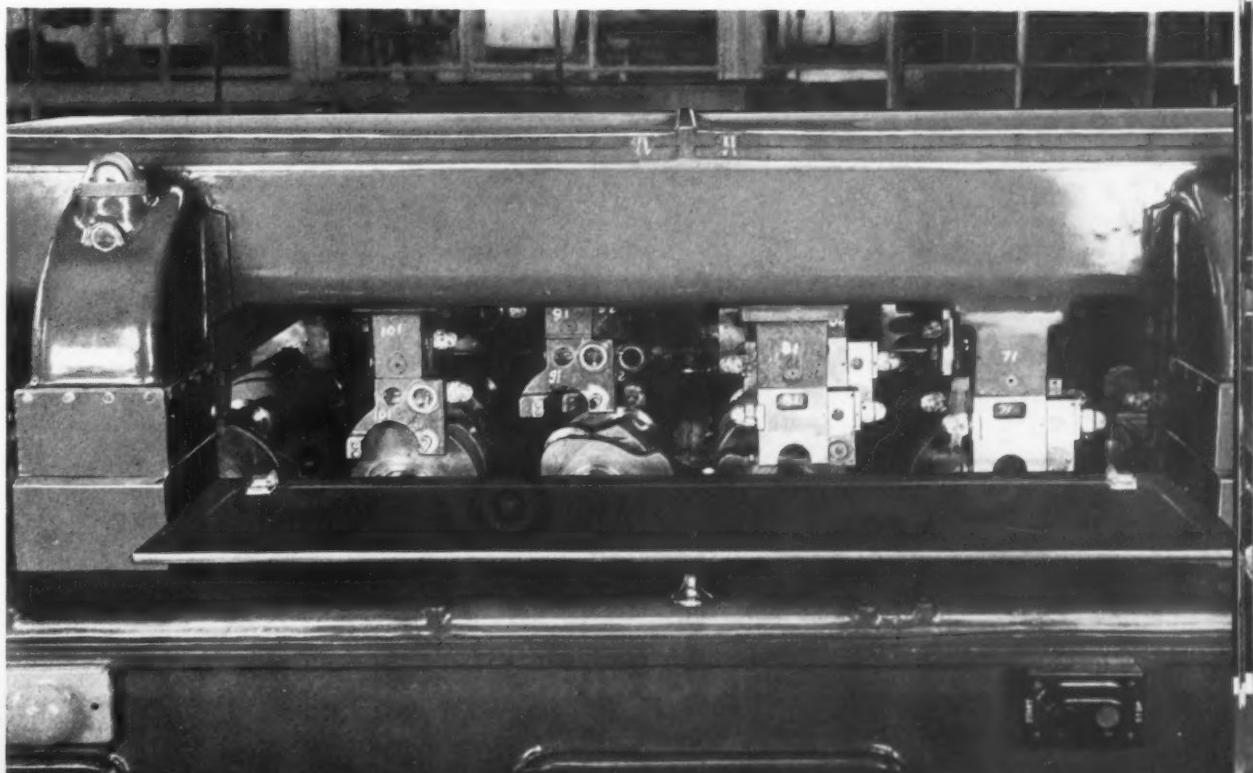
Inspection Machine from the Starting End, the Crankshaft being Shown in the Second Inspection Station; the Inclined Track at the Right Causes the Part to Rotate through 90 Degrees
